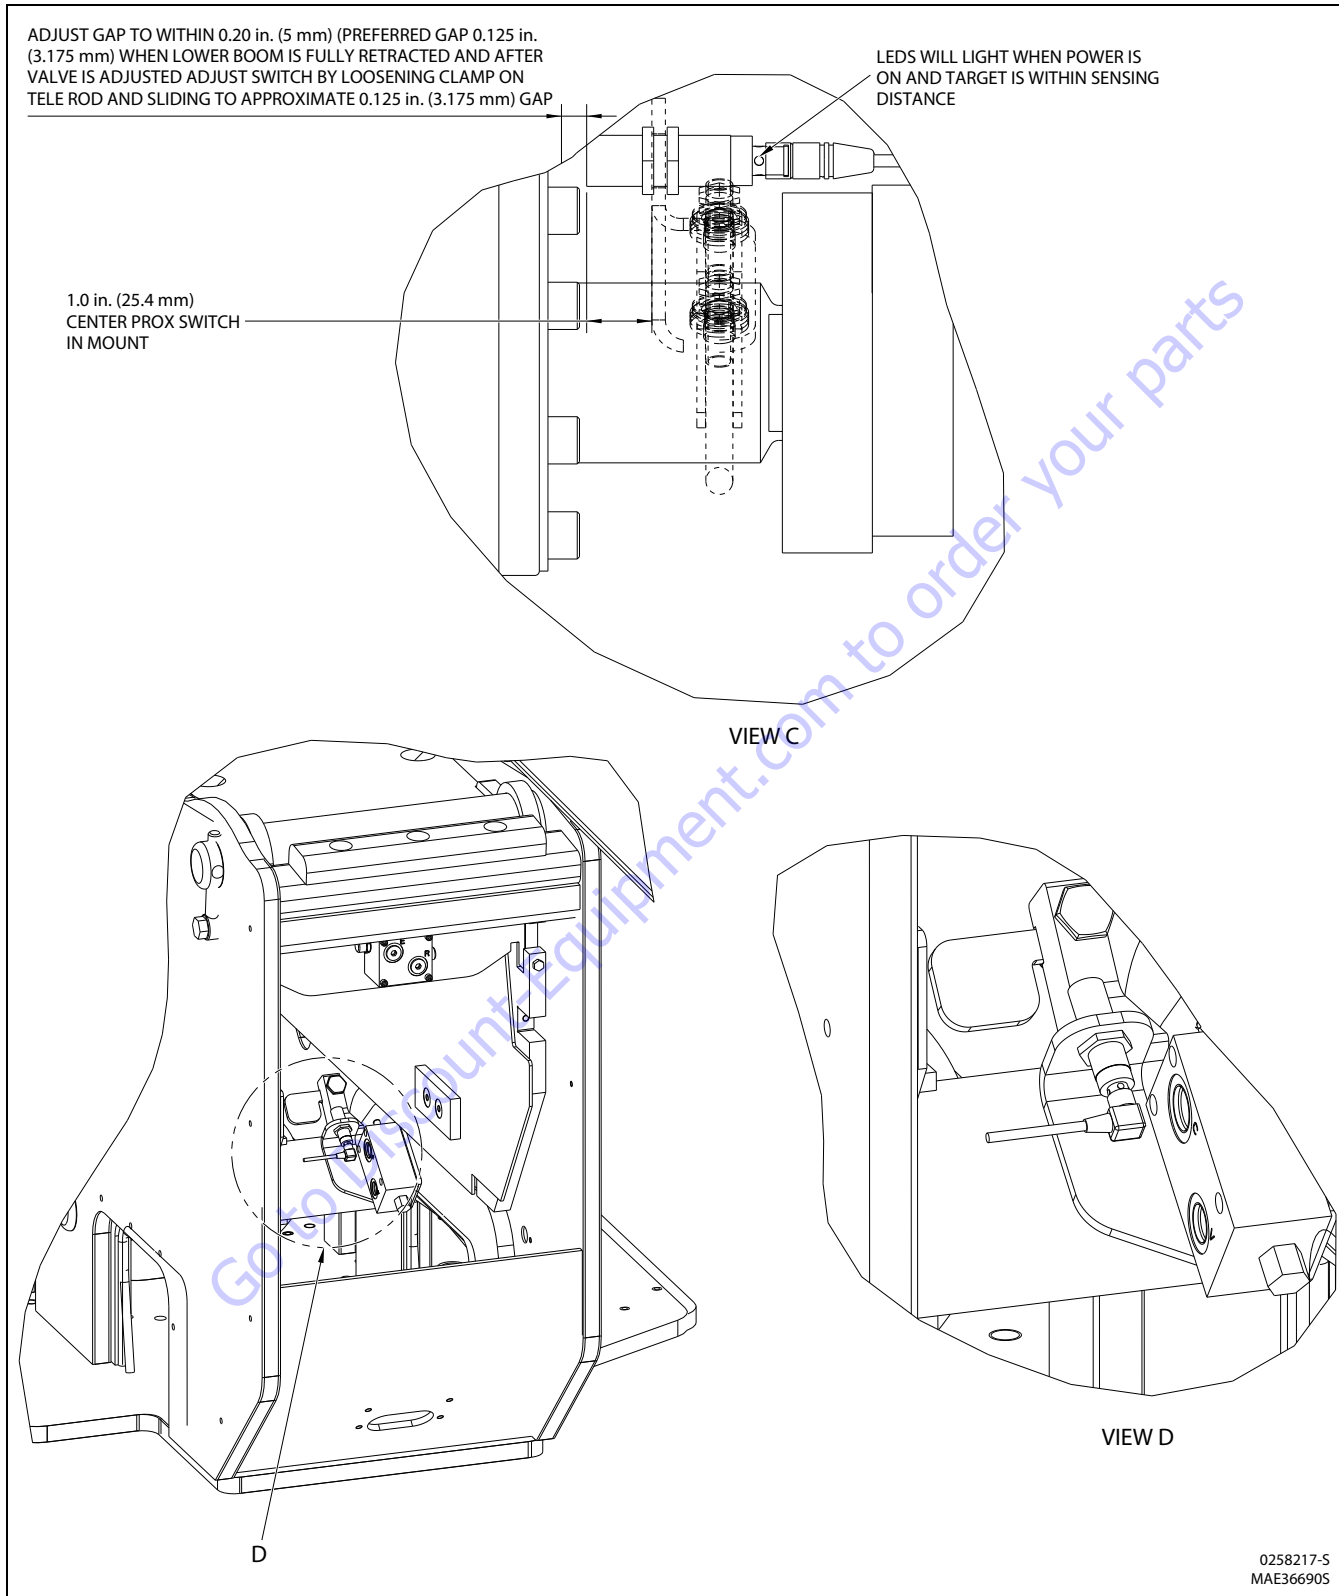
Boom Valve and Limit Switches Location (Sheet 2 of 2)
